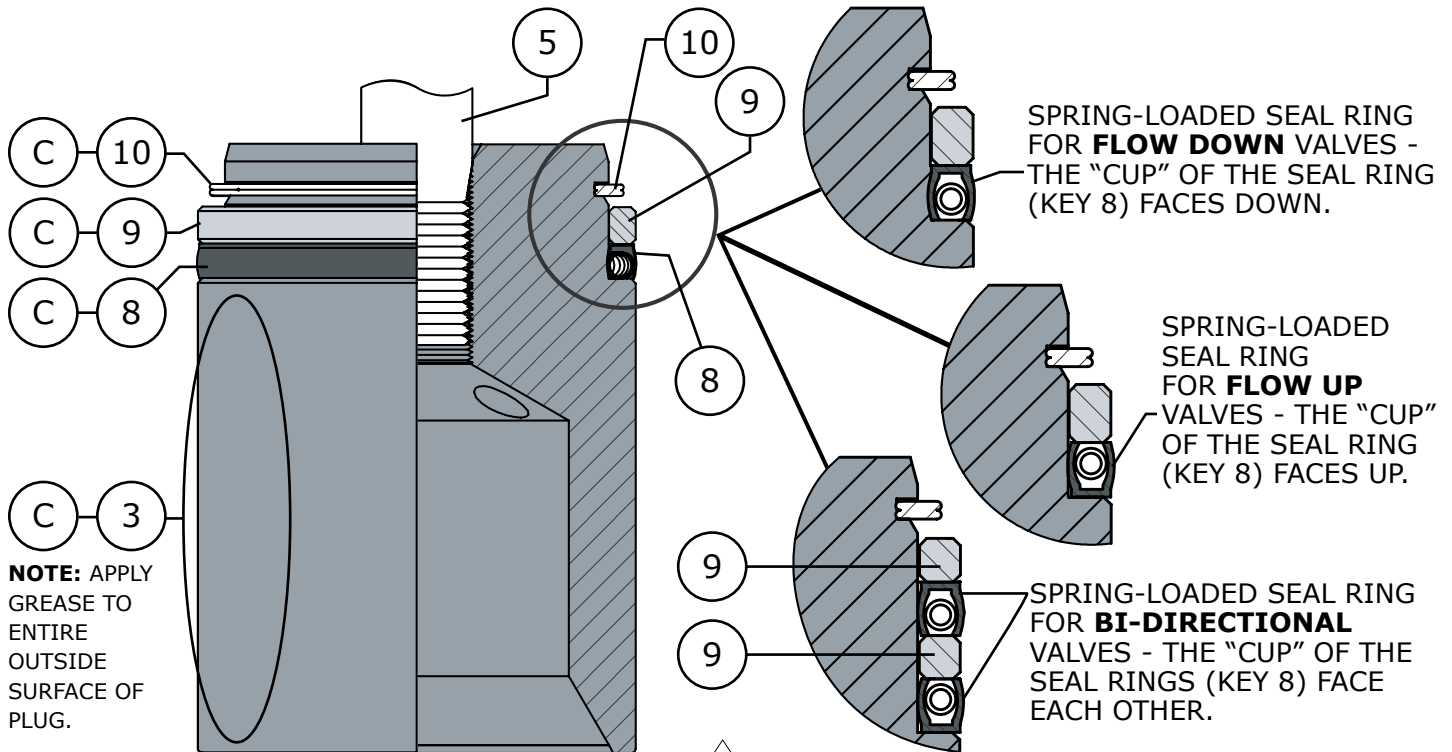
Three-Piece Plug Seal Assembly (Model 360 Only)
